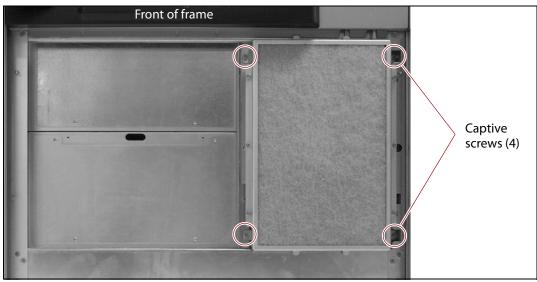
Loosen the captive screws securing the fan assembly to the frame.
